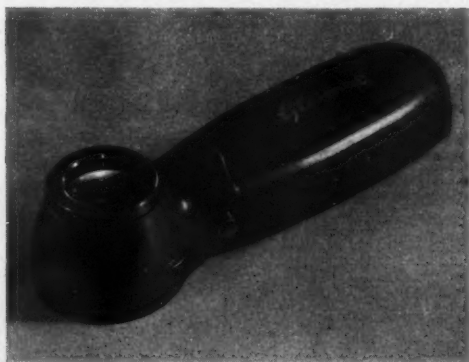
A smooth ground finish is produced on the horizontal surfaces and a "criss-cross" finish on the angular surfaces, as here shown
